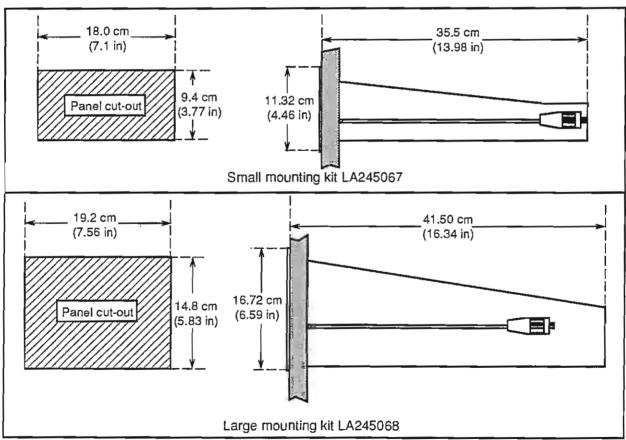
Disc drive unit mechanical installation: dimensions
